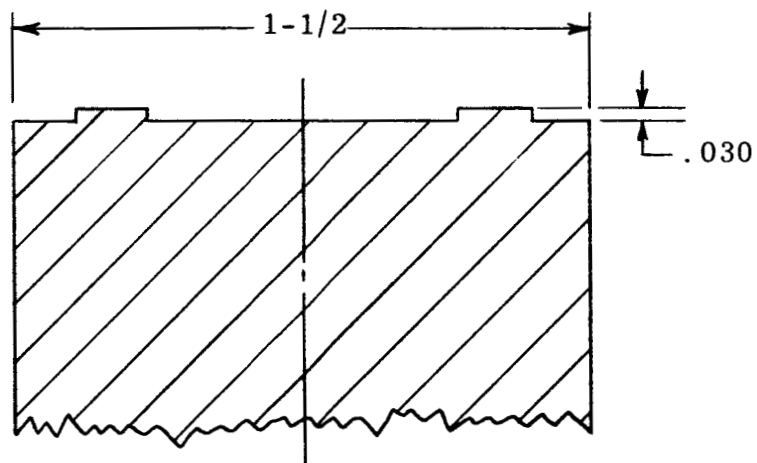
Metal-to-Metal Test Seal Geometry.
